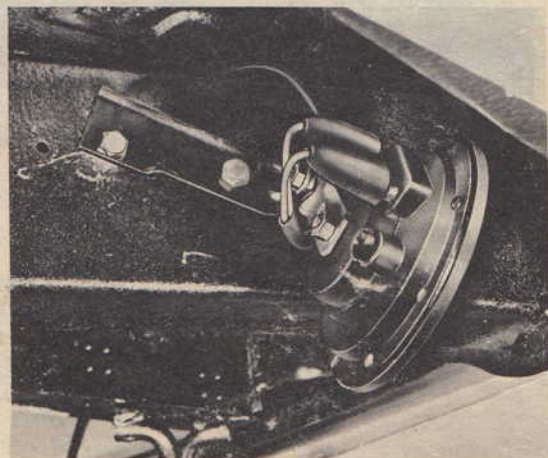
Install standard horn together with bracket to right front member, connect and route wiring as shown.
